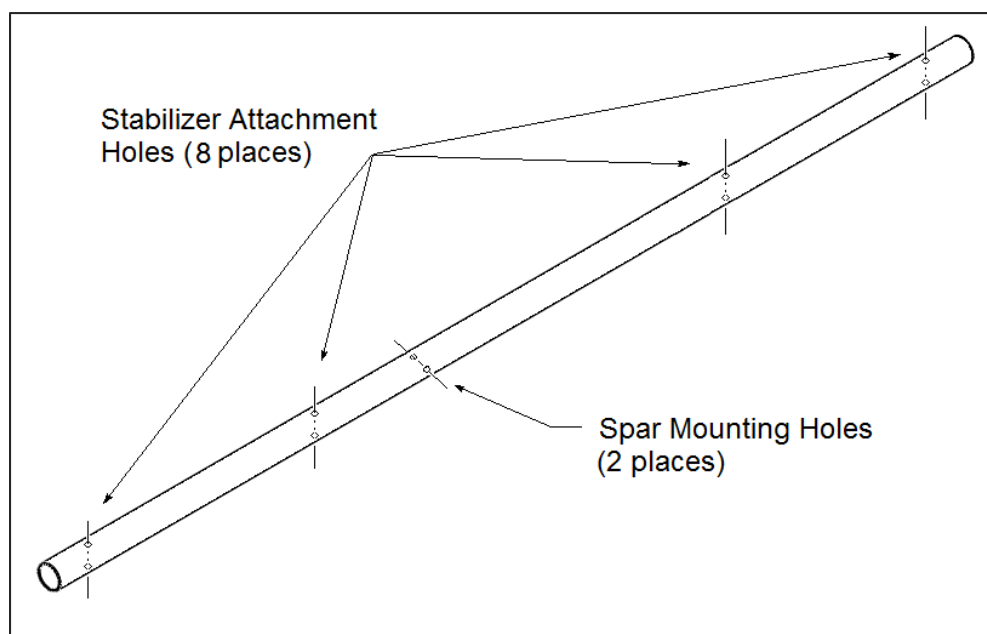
Stabilizer Spar Inspection – Stabilizer and Mounting Hole Attachment Points
